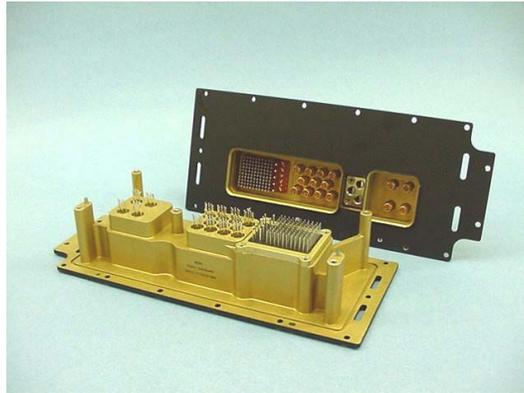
Quadrax PCB Version Installed in ARINC 600 Style Connector
